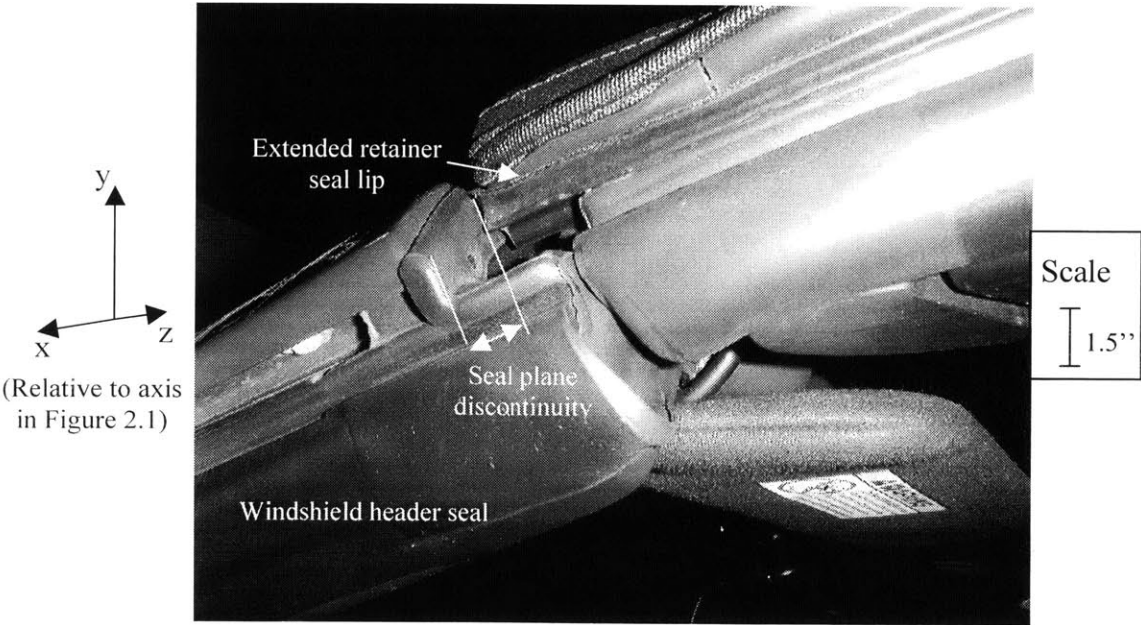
‘A-Pivot’ Water Seal Mock-Up – Roof Clamping Hooks Disengaged
